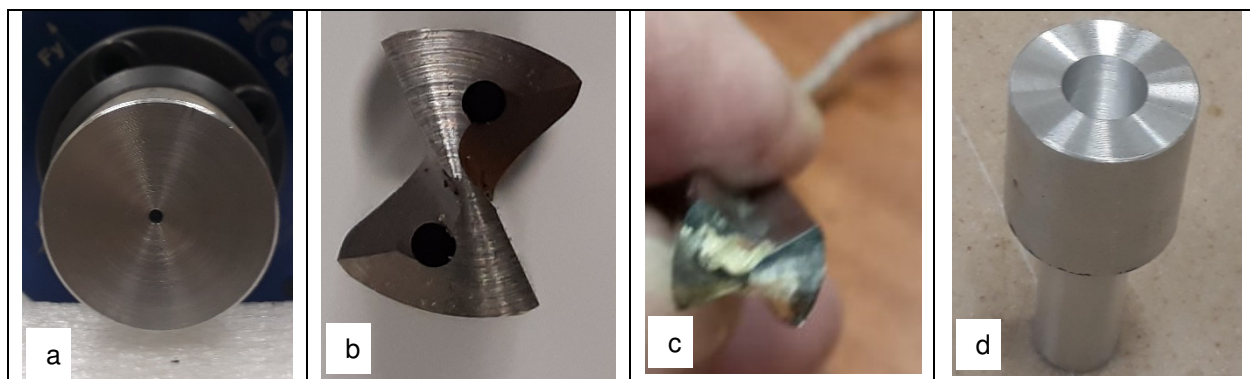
Photograph reporting a) Pre-cored Workpiece b) Drilled workpiece c) Guhring RT150 straight flute drill d) Thermocouples brazed on the drill flank face
